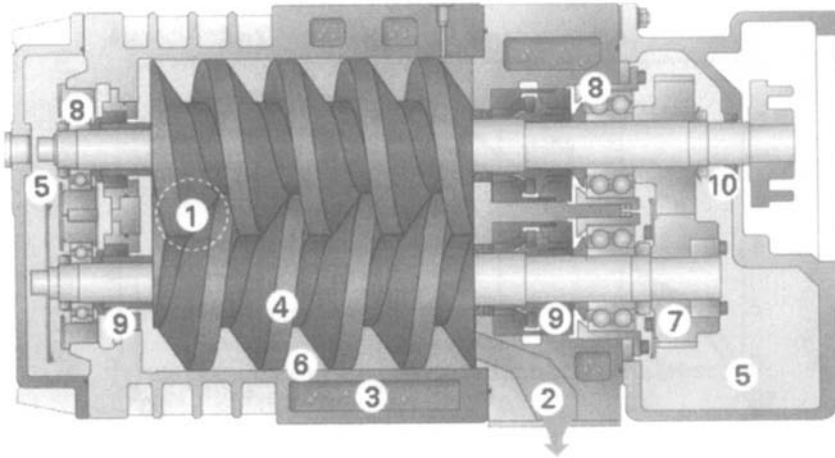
Cross-sectional view of a screw vacuum pump. (1) Inlet, (2) discharge, (3) cooling jacket, (4) screws, (5) gear case, (6) stator housing, (7) drive gears, (8) shaft bearings, (9) shaft seals, (10) motor shaft seal. Reprinted with permission from Busch Semiconductor Vacuum Group, 18430 Sutter Blvd., Morgan Hill, CA 95037.
